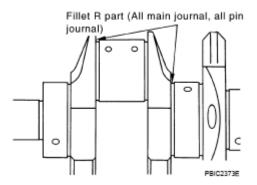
Identifying Crankshaft Main Journal Courtesy of NISSAN MOTOR CO., U.S.A.
